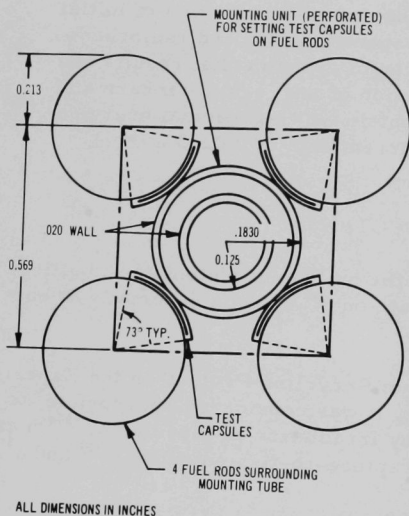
Experimental Arrangement of Test Capsules Set on Fuel Rods with Aid of Mounting Unit (cross-sectional view shown). ANL Neg. No. 112-6823.
